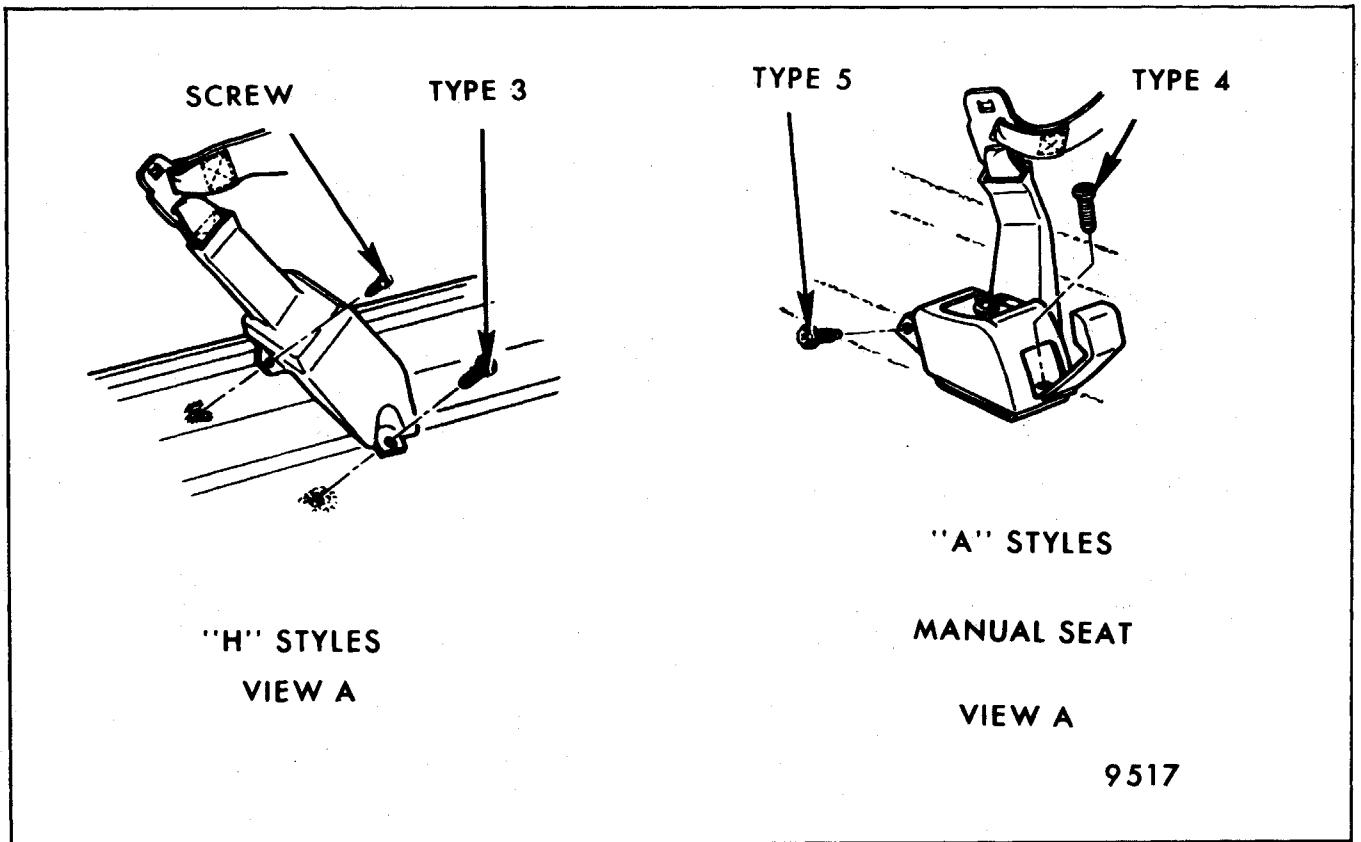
Front Seat Outer Lap Belts and Retractors - "A and H" Styles
